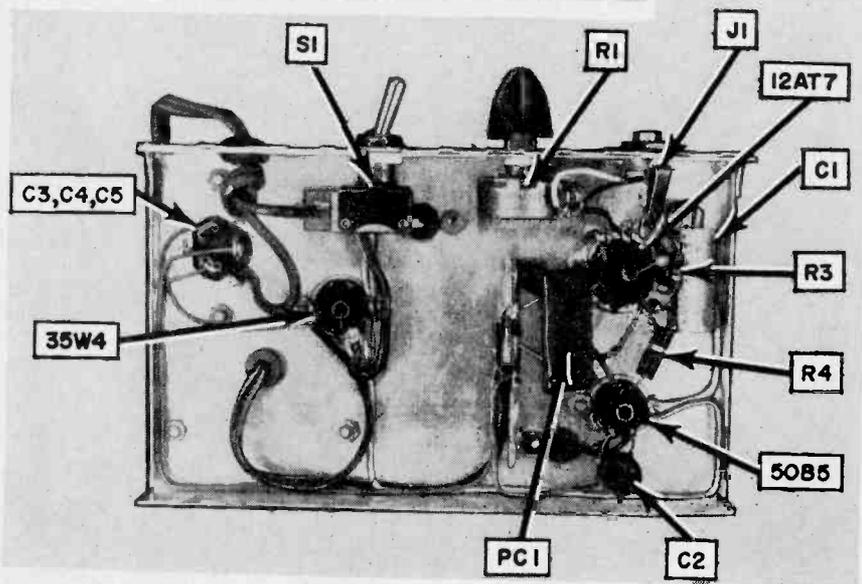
Below-chassis view of the wired unit. Parts are identified.
